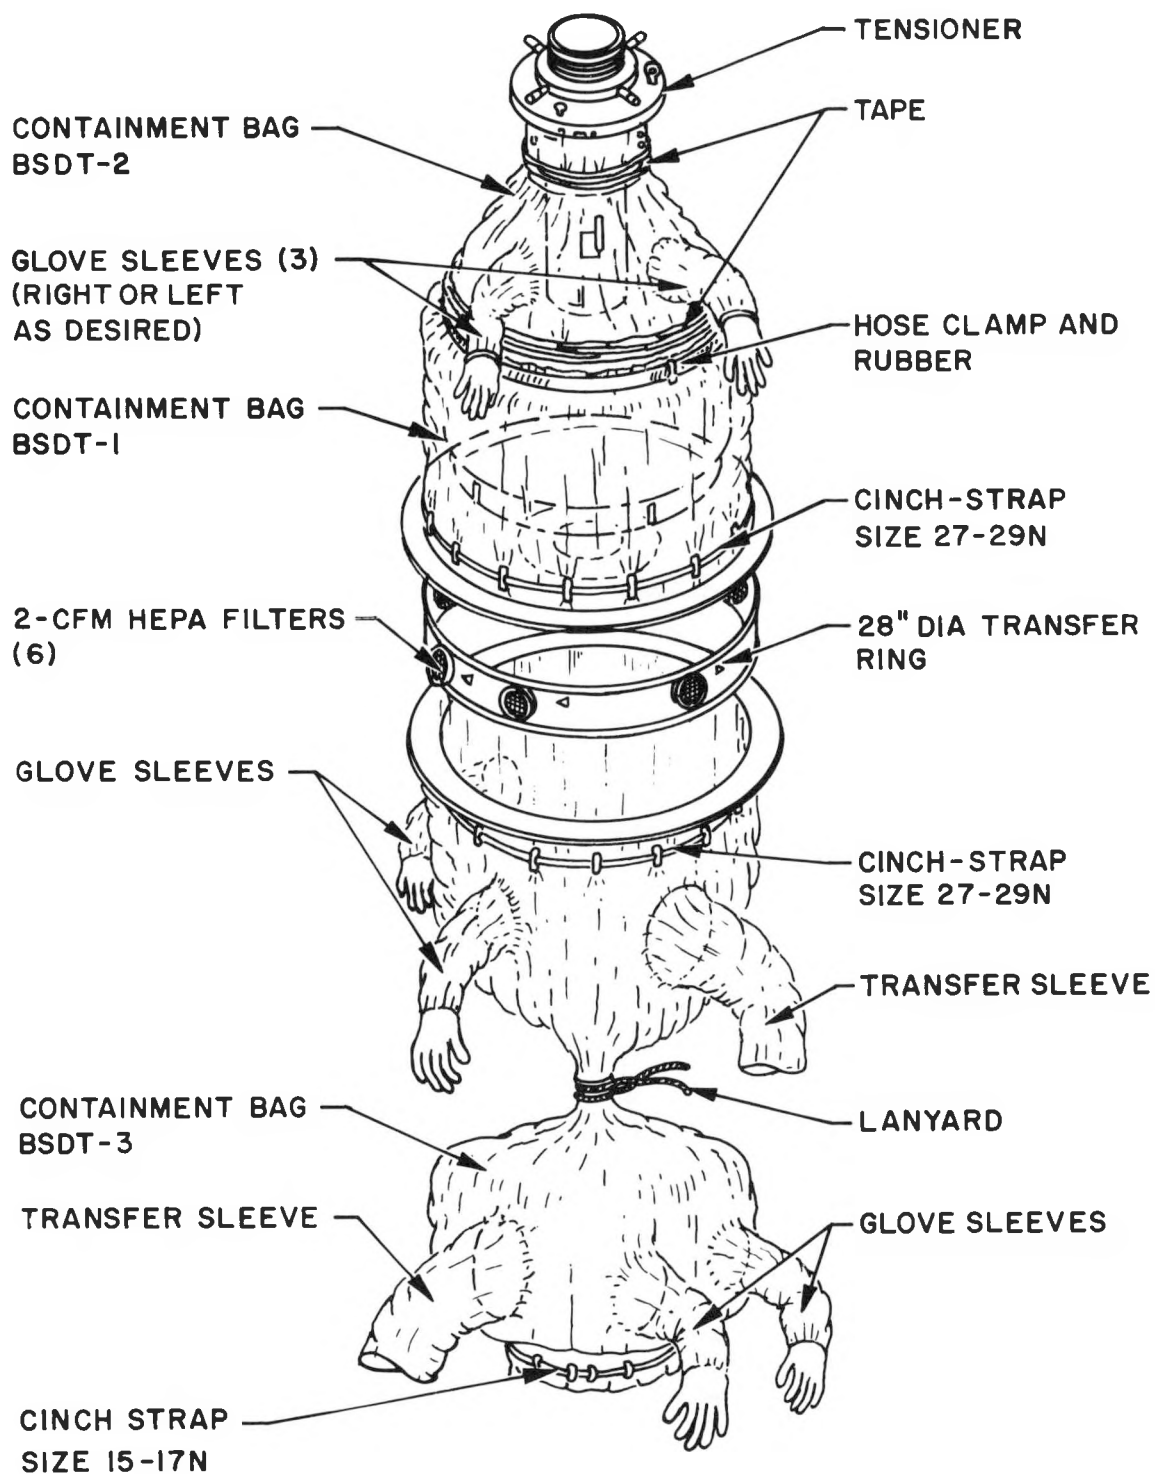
Containment Assembly for Breechlock Sleeve Detensioning
